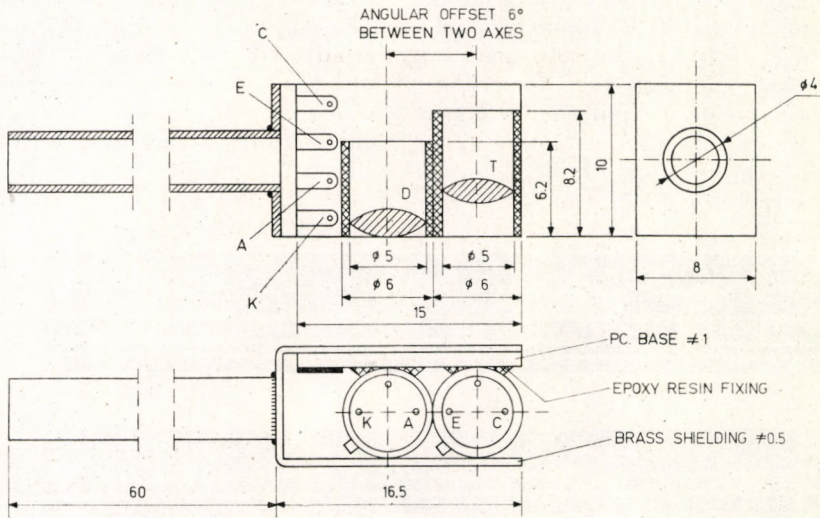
Layout of the movement indicator sensing head, with principle dimensional outlines
